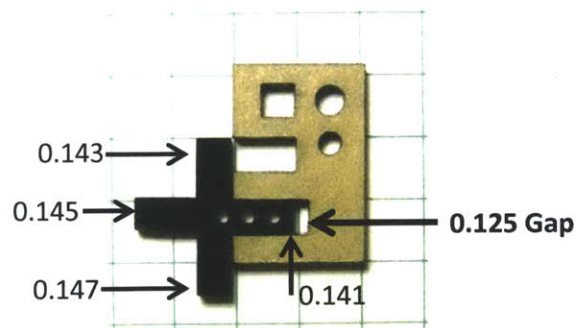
Custom feeler gauge made to find optimum gap for press fit and clearance fit. Dimensions are in inches.
